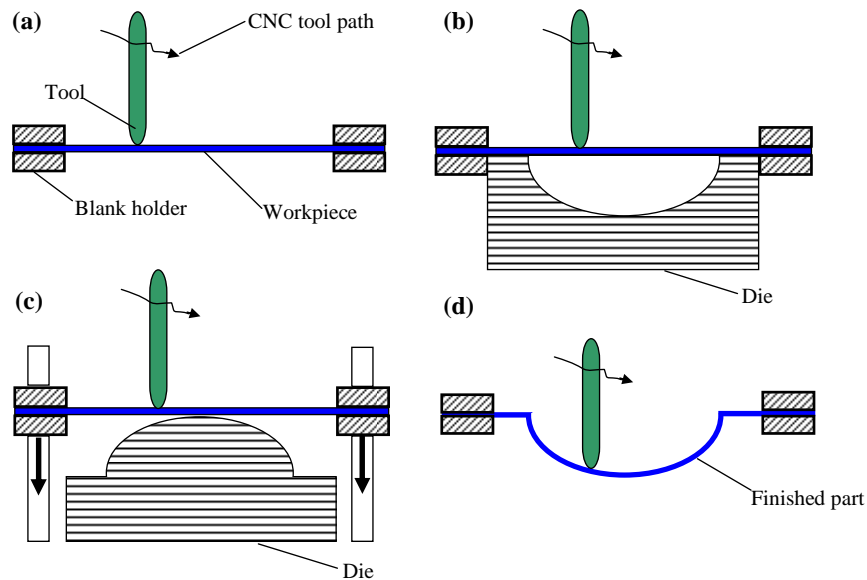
Three configurations of the incremental sheet forming process[53]; (a) Single point incremental sheet forming; (b) Incremental sheet forming with negative die; (c) Incremental sheet forming with positive die and (d) Completed part using (a) and (b)
